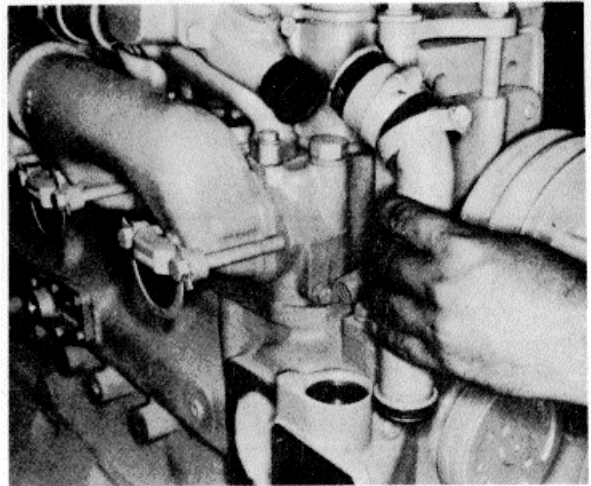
, (N100119). Removing water transfer tube (FFC Series)
